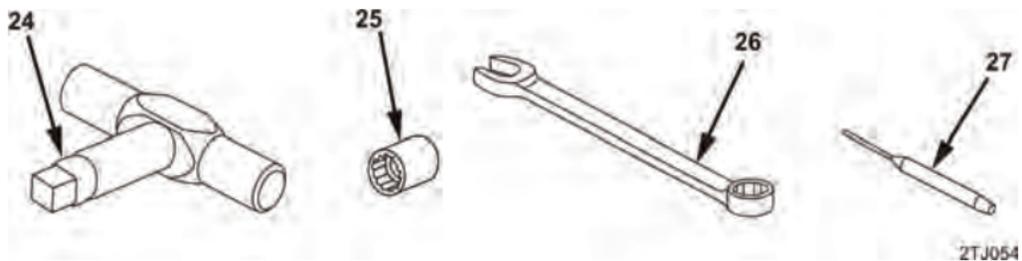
Deployment Tool Kit, TK-1 (Sheet 1 of 2).
